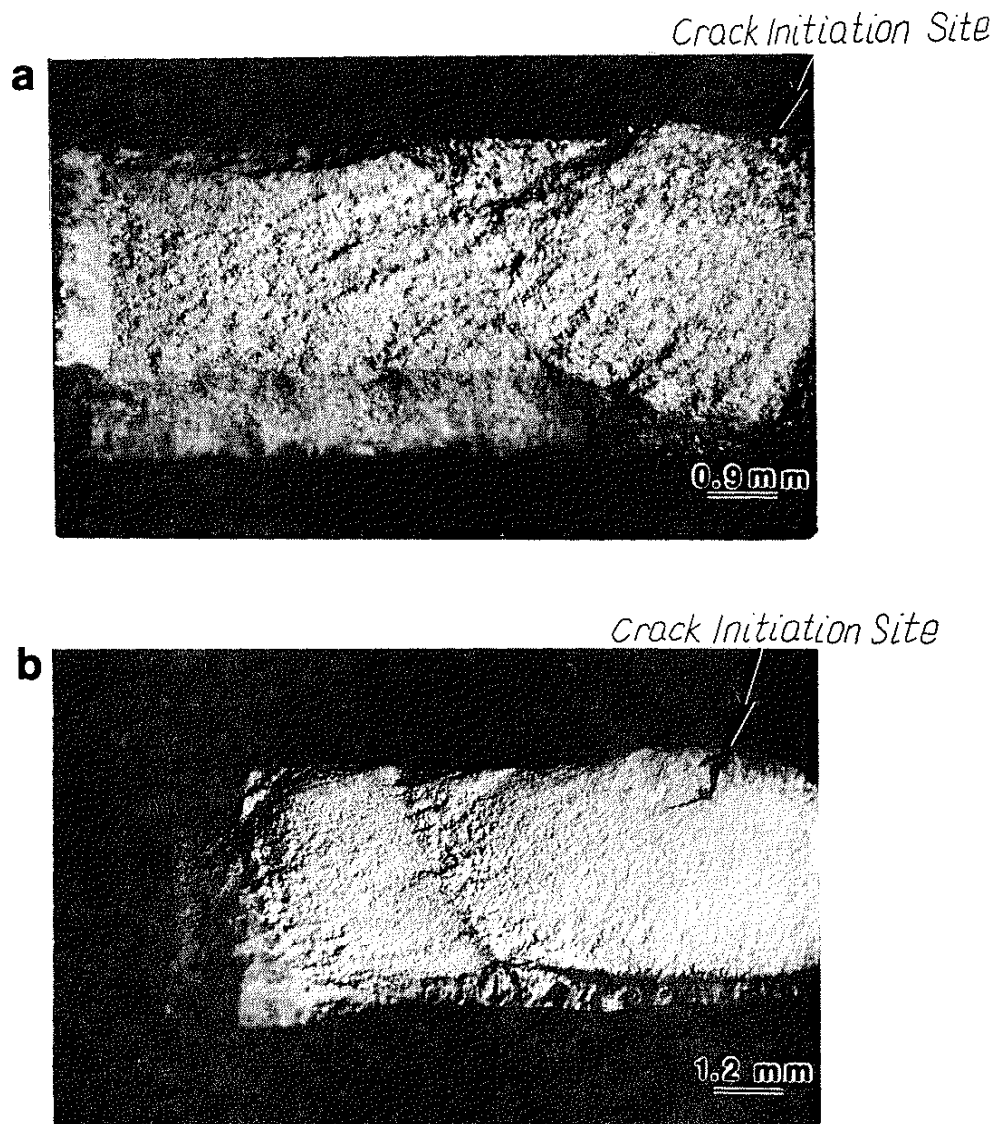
Fracture surface of welded 18 Ni (250) maraging steel after fatigue test: a) As-welded (AW) -- fatigue crack initiation site was at the weld toe, b) Laser-dressed (LD) -- fatigue crack initiation site was at the new weld toe.
